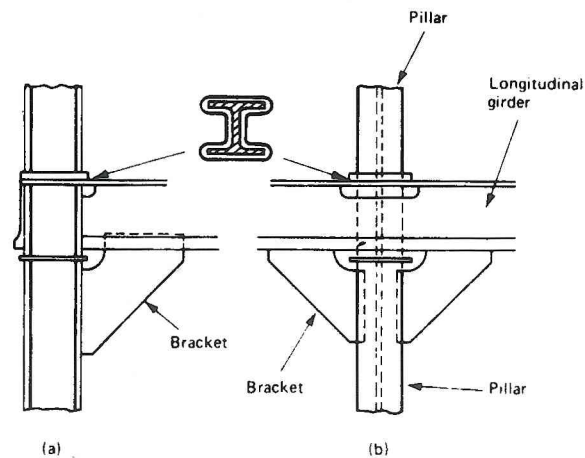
Machinery space pillar arrangements: (a) sectional elevation looking aft; (b) elevation looking outboard
